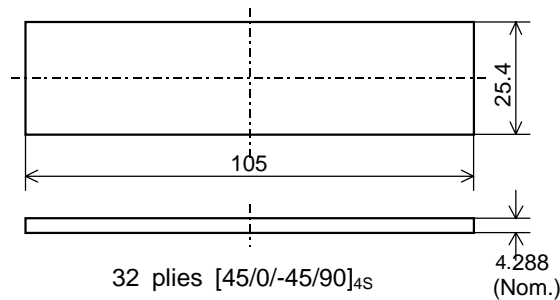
Geometry of specimens and traveler coupons; dimensions in mm
